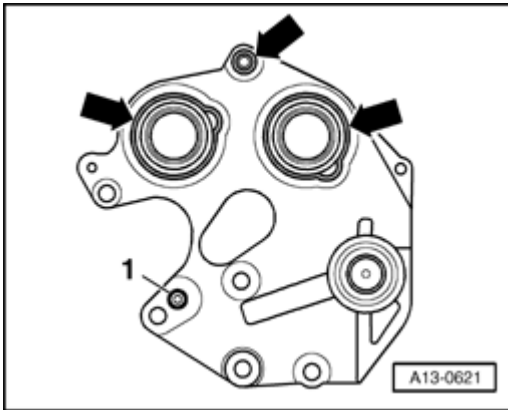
Applying Sealant Beads On Clean Sealing Surfaces Of Front Bearing Cap
